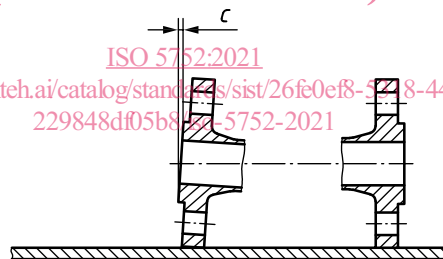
Tolerances on parallelism and perpendicularity
